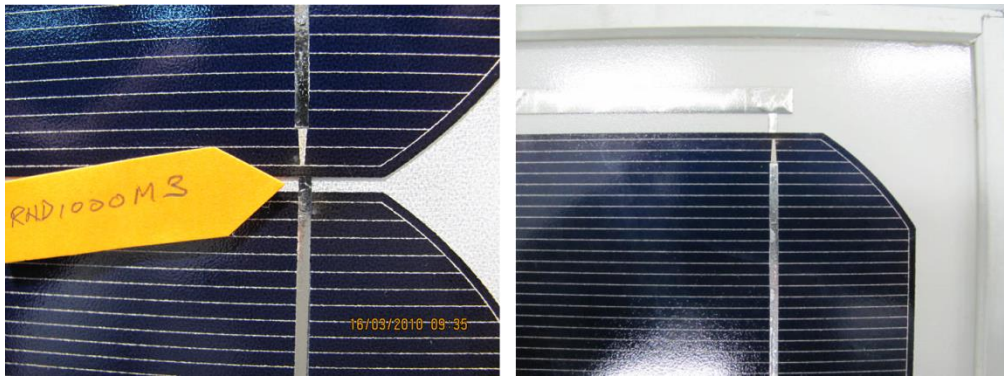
Photos of mono-Si PV module. Size: 1581 x 809 x 40 mm. Glass-Backsheet structure with frame and edge sealing adhesive.
